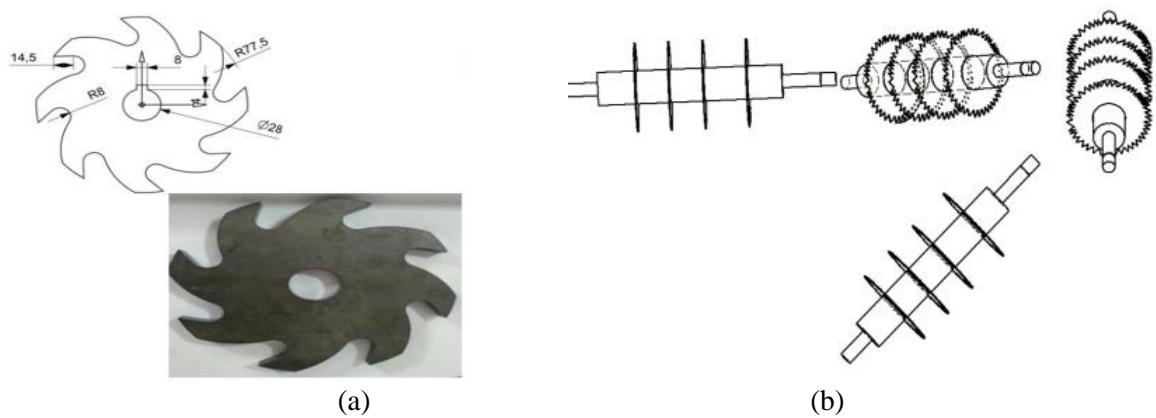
(a) Single circular shedding blade (b) Circular disc cutting blade
